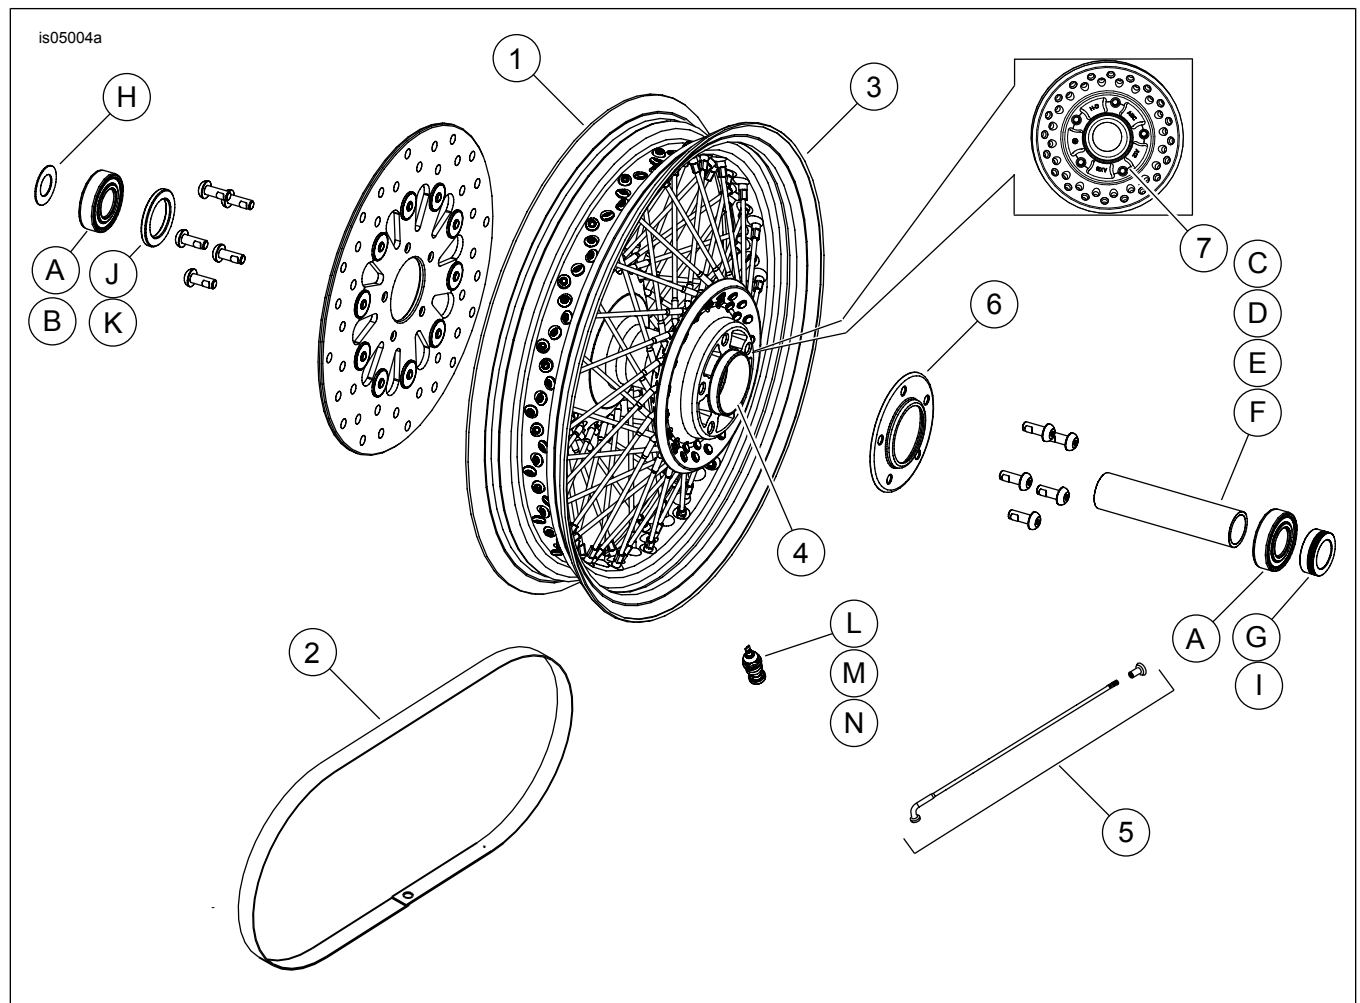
Service Parts: 80-Spoke Front Wheel (21-inch wheel shown)
